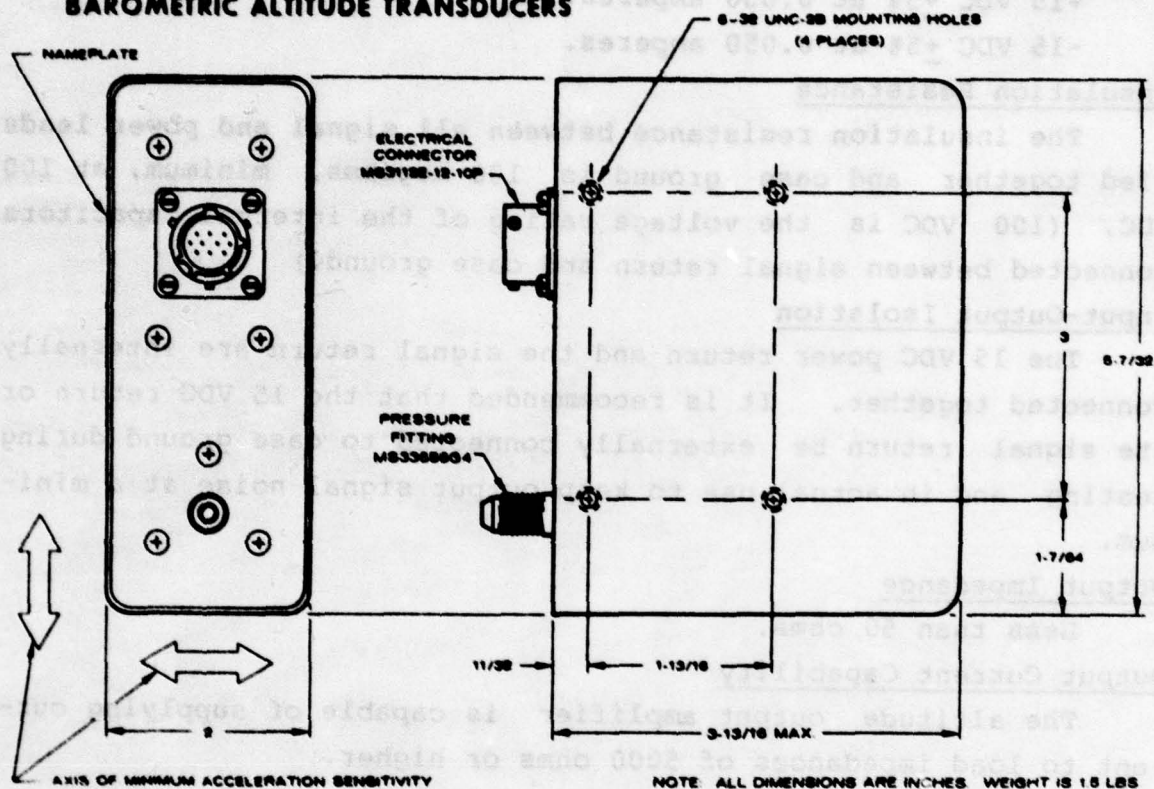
Dimensional Drawing of the Model 1241 Altimeter
